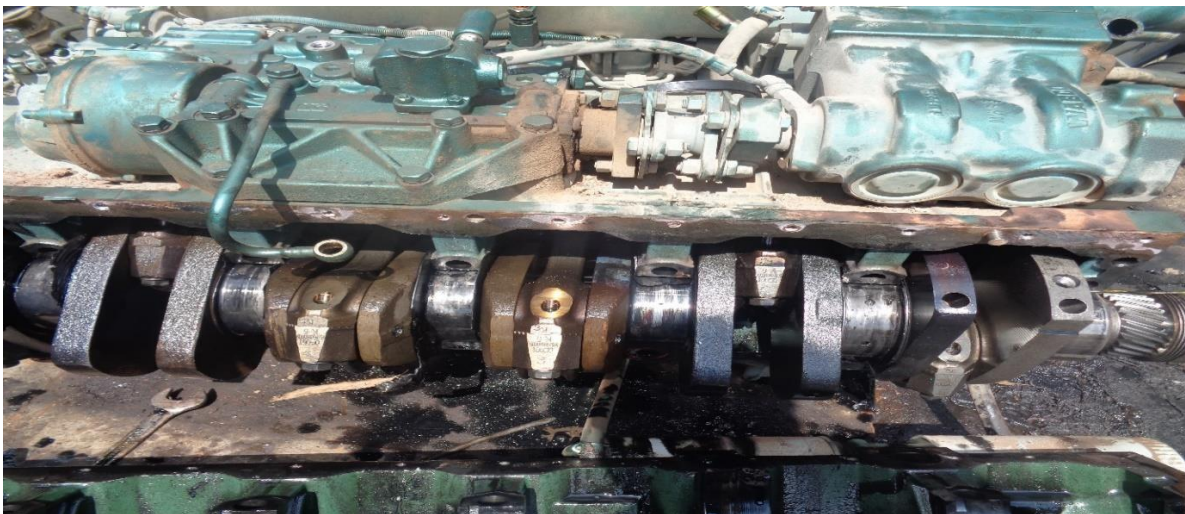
Engine crank shaft with shell bearing where damage due to oil starvation
